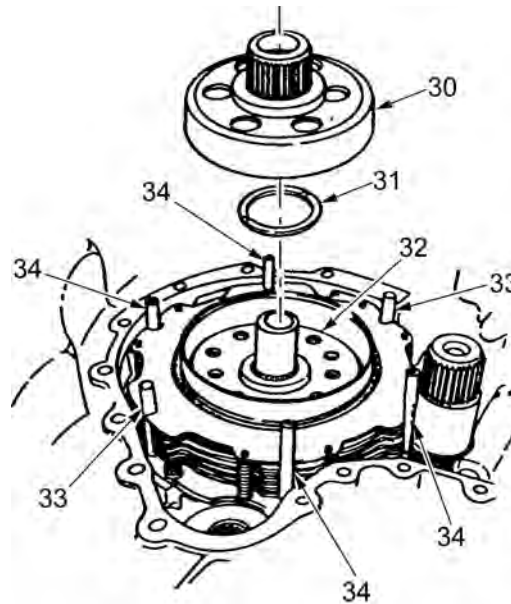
Pins, Spur Gear Cluster, and Thrust Washer Bearing Removal.
